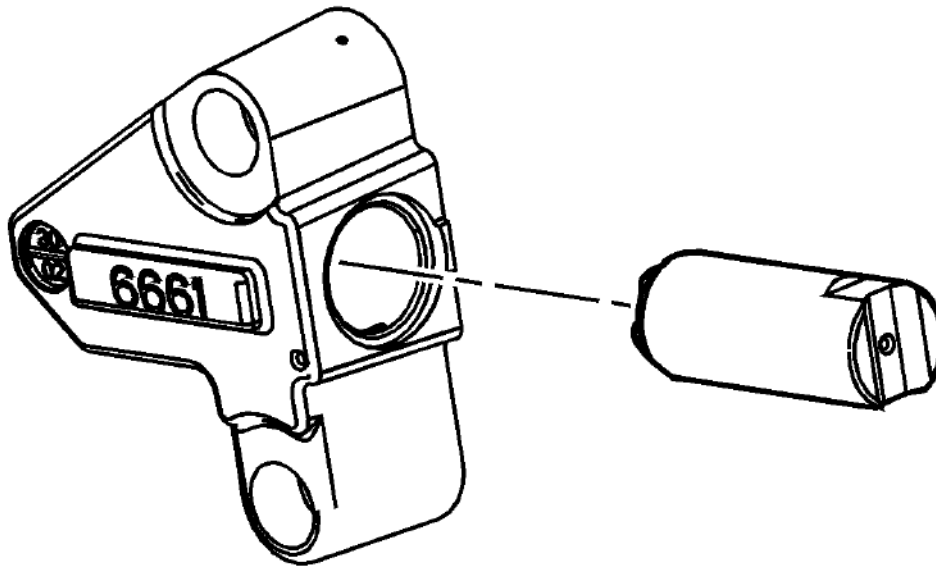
View Of Plunger & Left Secondary Camshaft Drive Chain Tensioner Body
